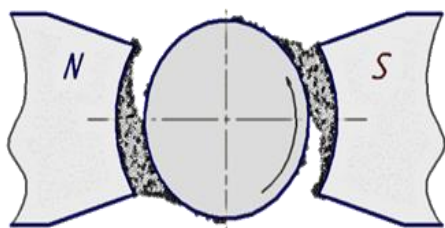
Finishing of Cylindrical Component by abrasive finishing
